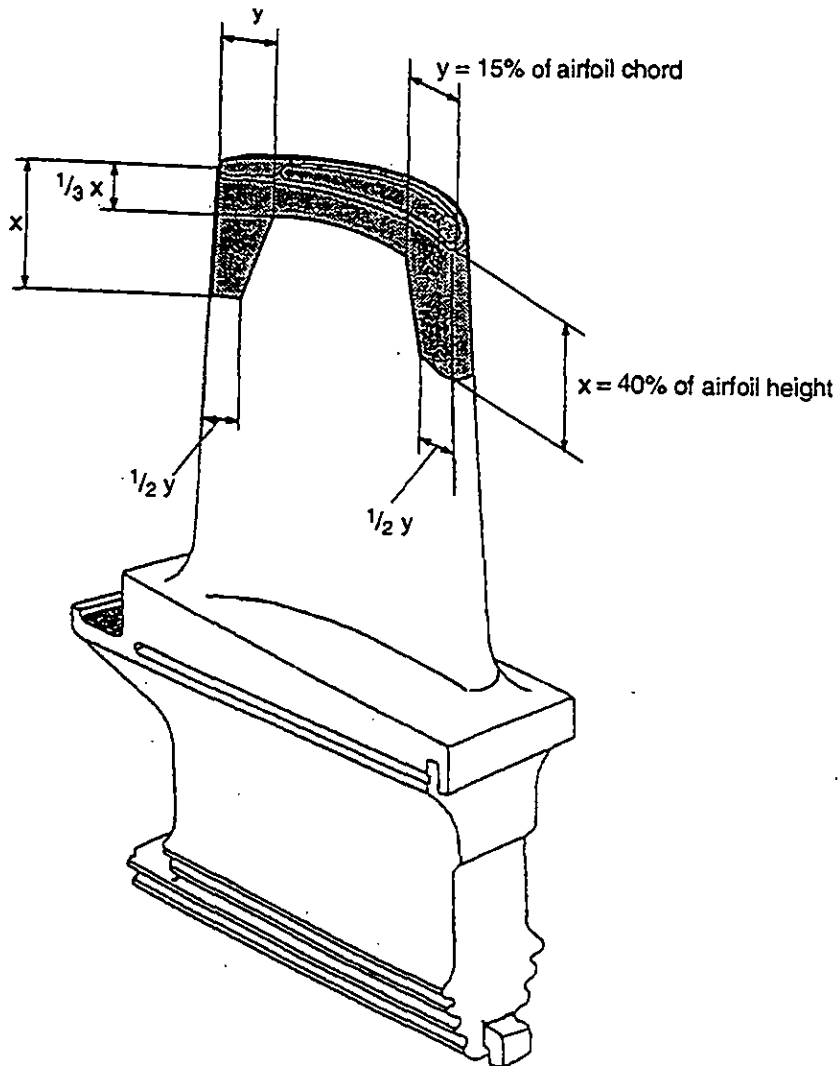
SKETCH OF WELDING REPAIR LIMITS
